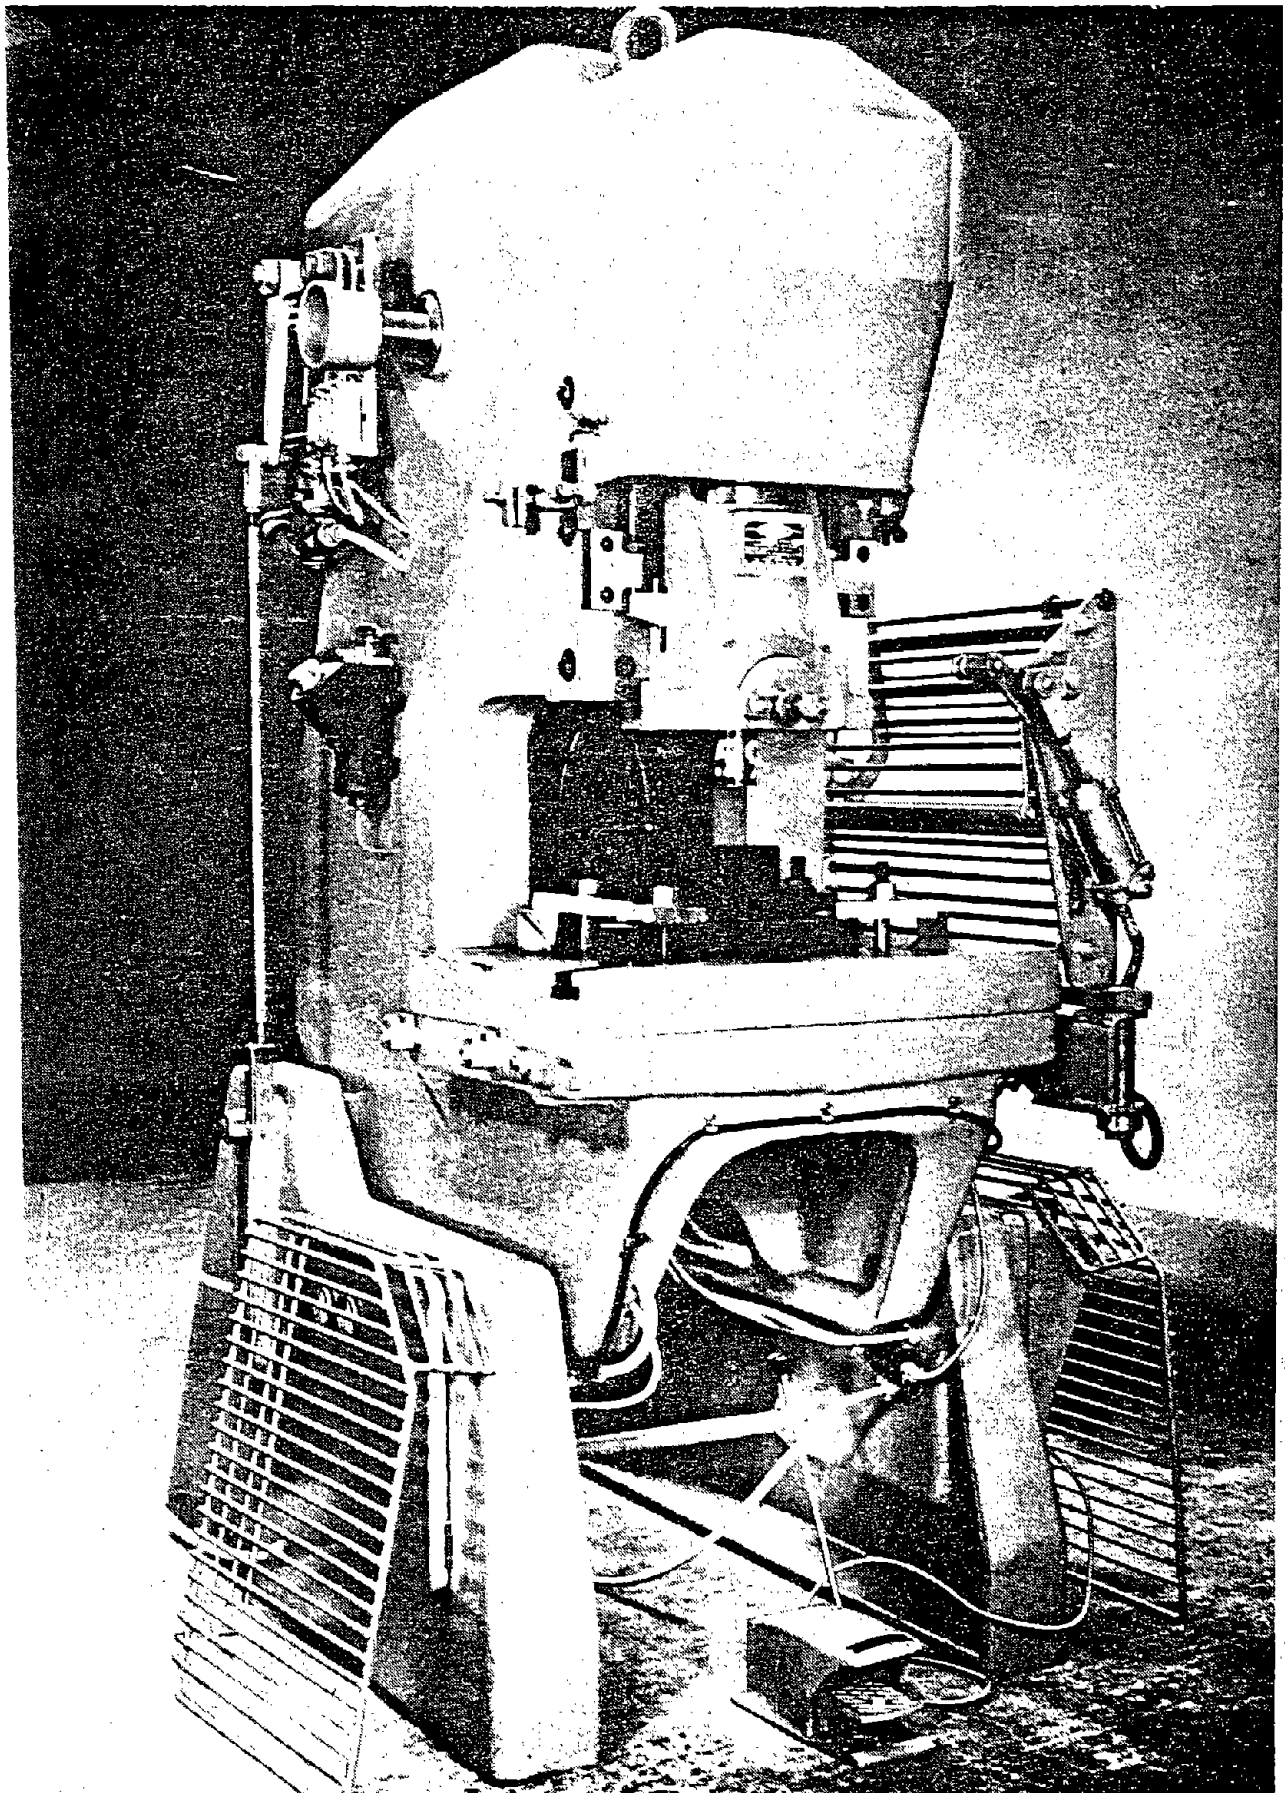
View of gap frame mechanical power press (barriers removed for clarity).
